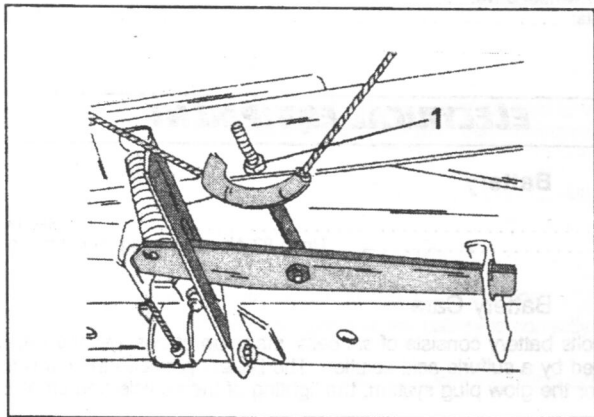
The nut (1) in the centre of the handbrake cable equaliser bracket is used to adjust the handbrake.
